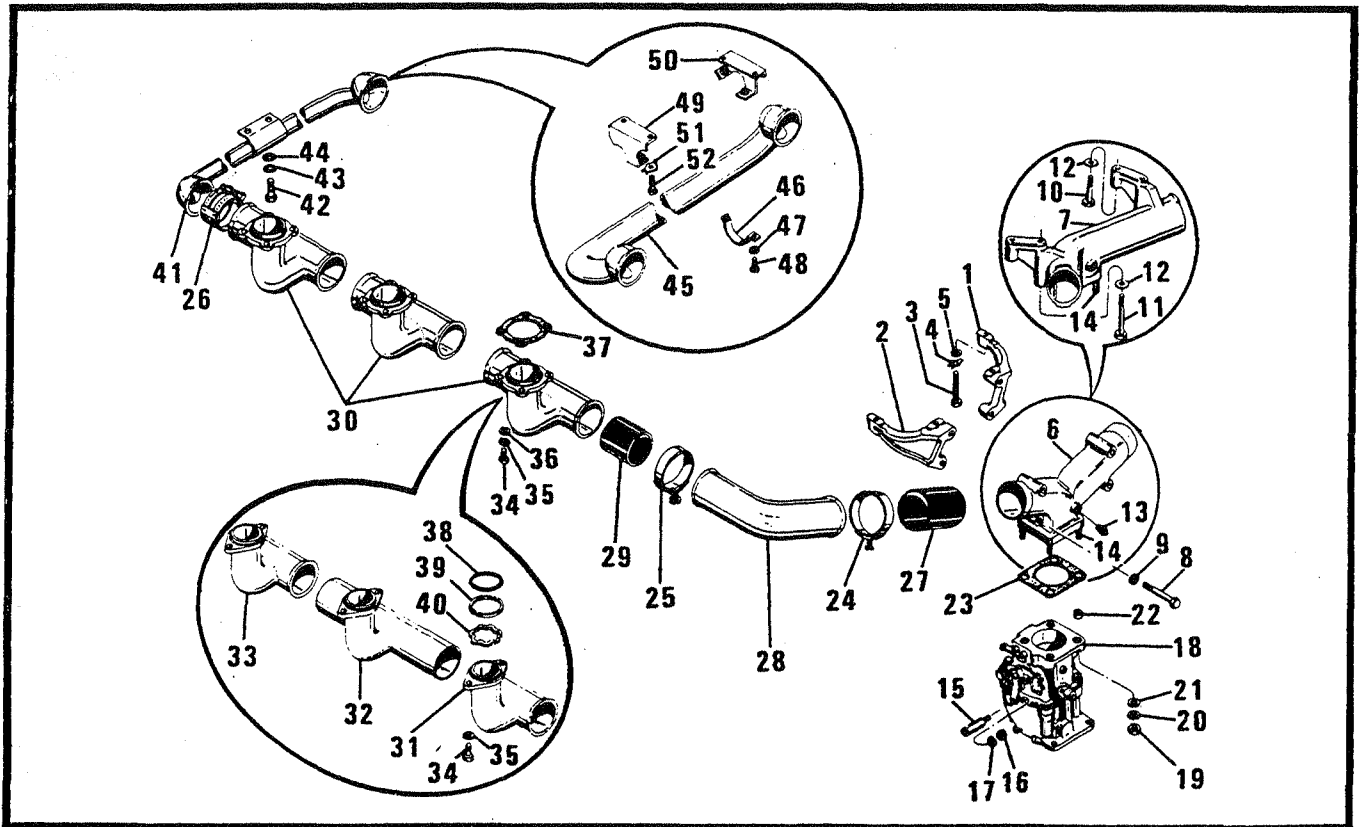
A. CARBURETOR AND INDUCTION SYSTEM MODELS O-470-A,J,K,L,R,S,U.
